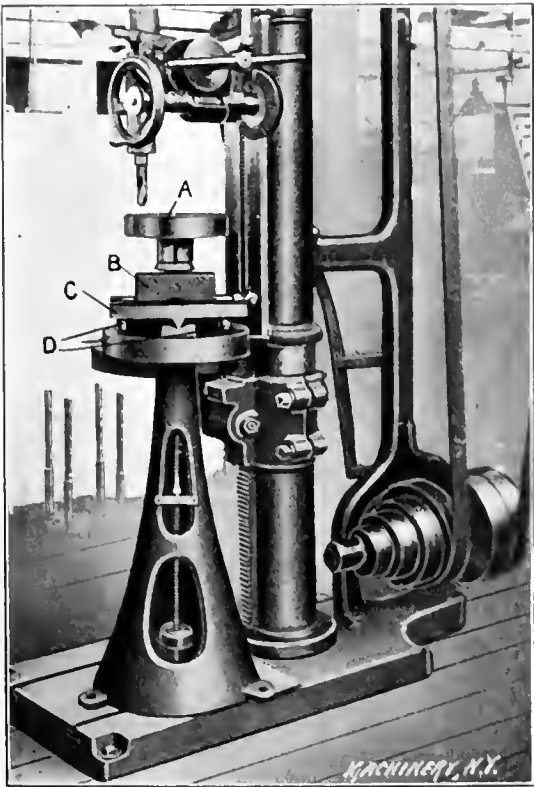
Machine for Balancing the Rotative Parts of the Turbine.
